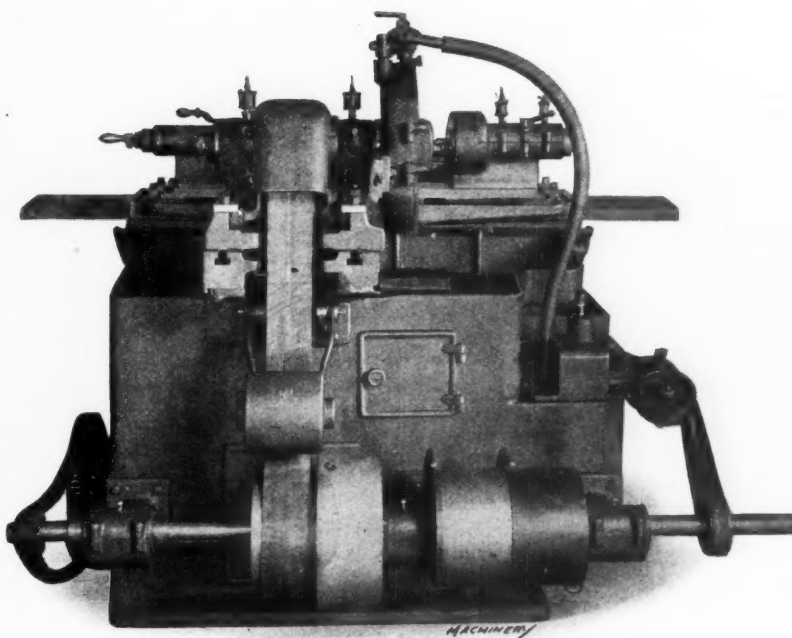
Rear View of Modern 8-by 18-inch Self-contained Grinder, showing Arrangement of Main Driving Shaft
